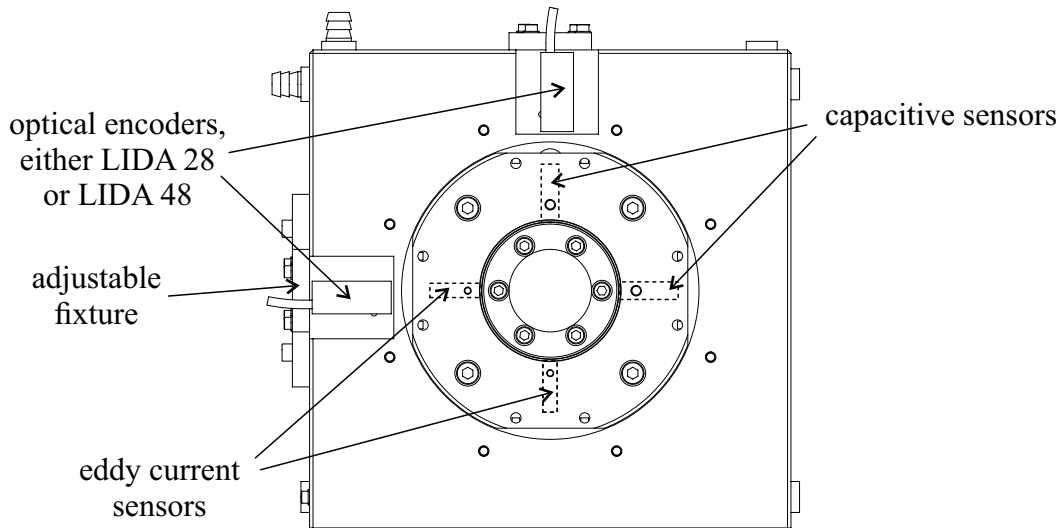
Sensor arrangement in the magnetic bearing prototype, displayed without encoder scale
